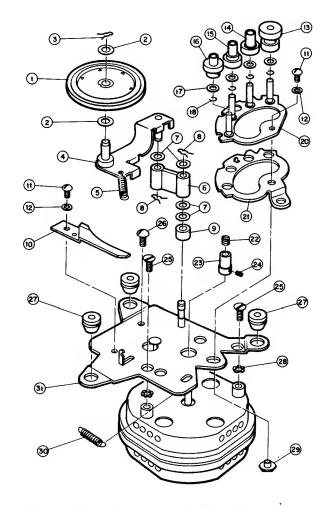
Four-Pole Motor Assembly (Stamped 971584-1)
